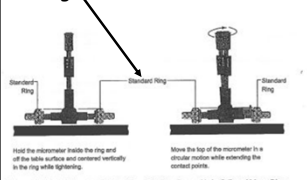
Techniques for Using the Three-Point Bore Gauge with the Calibrated Master Ring
